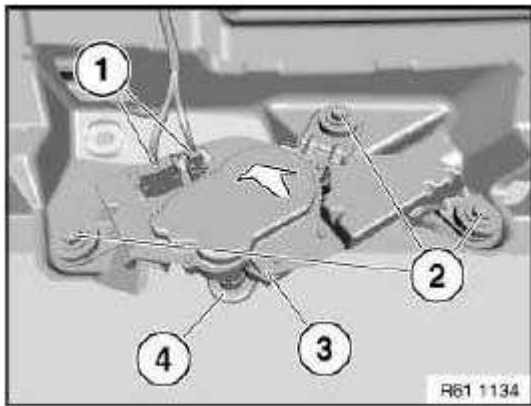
Identifying Plug Connections And Rear Window Wiper Motor
